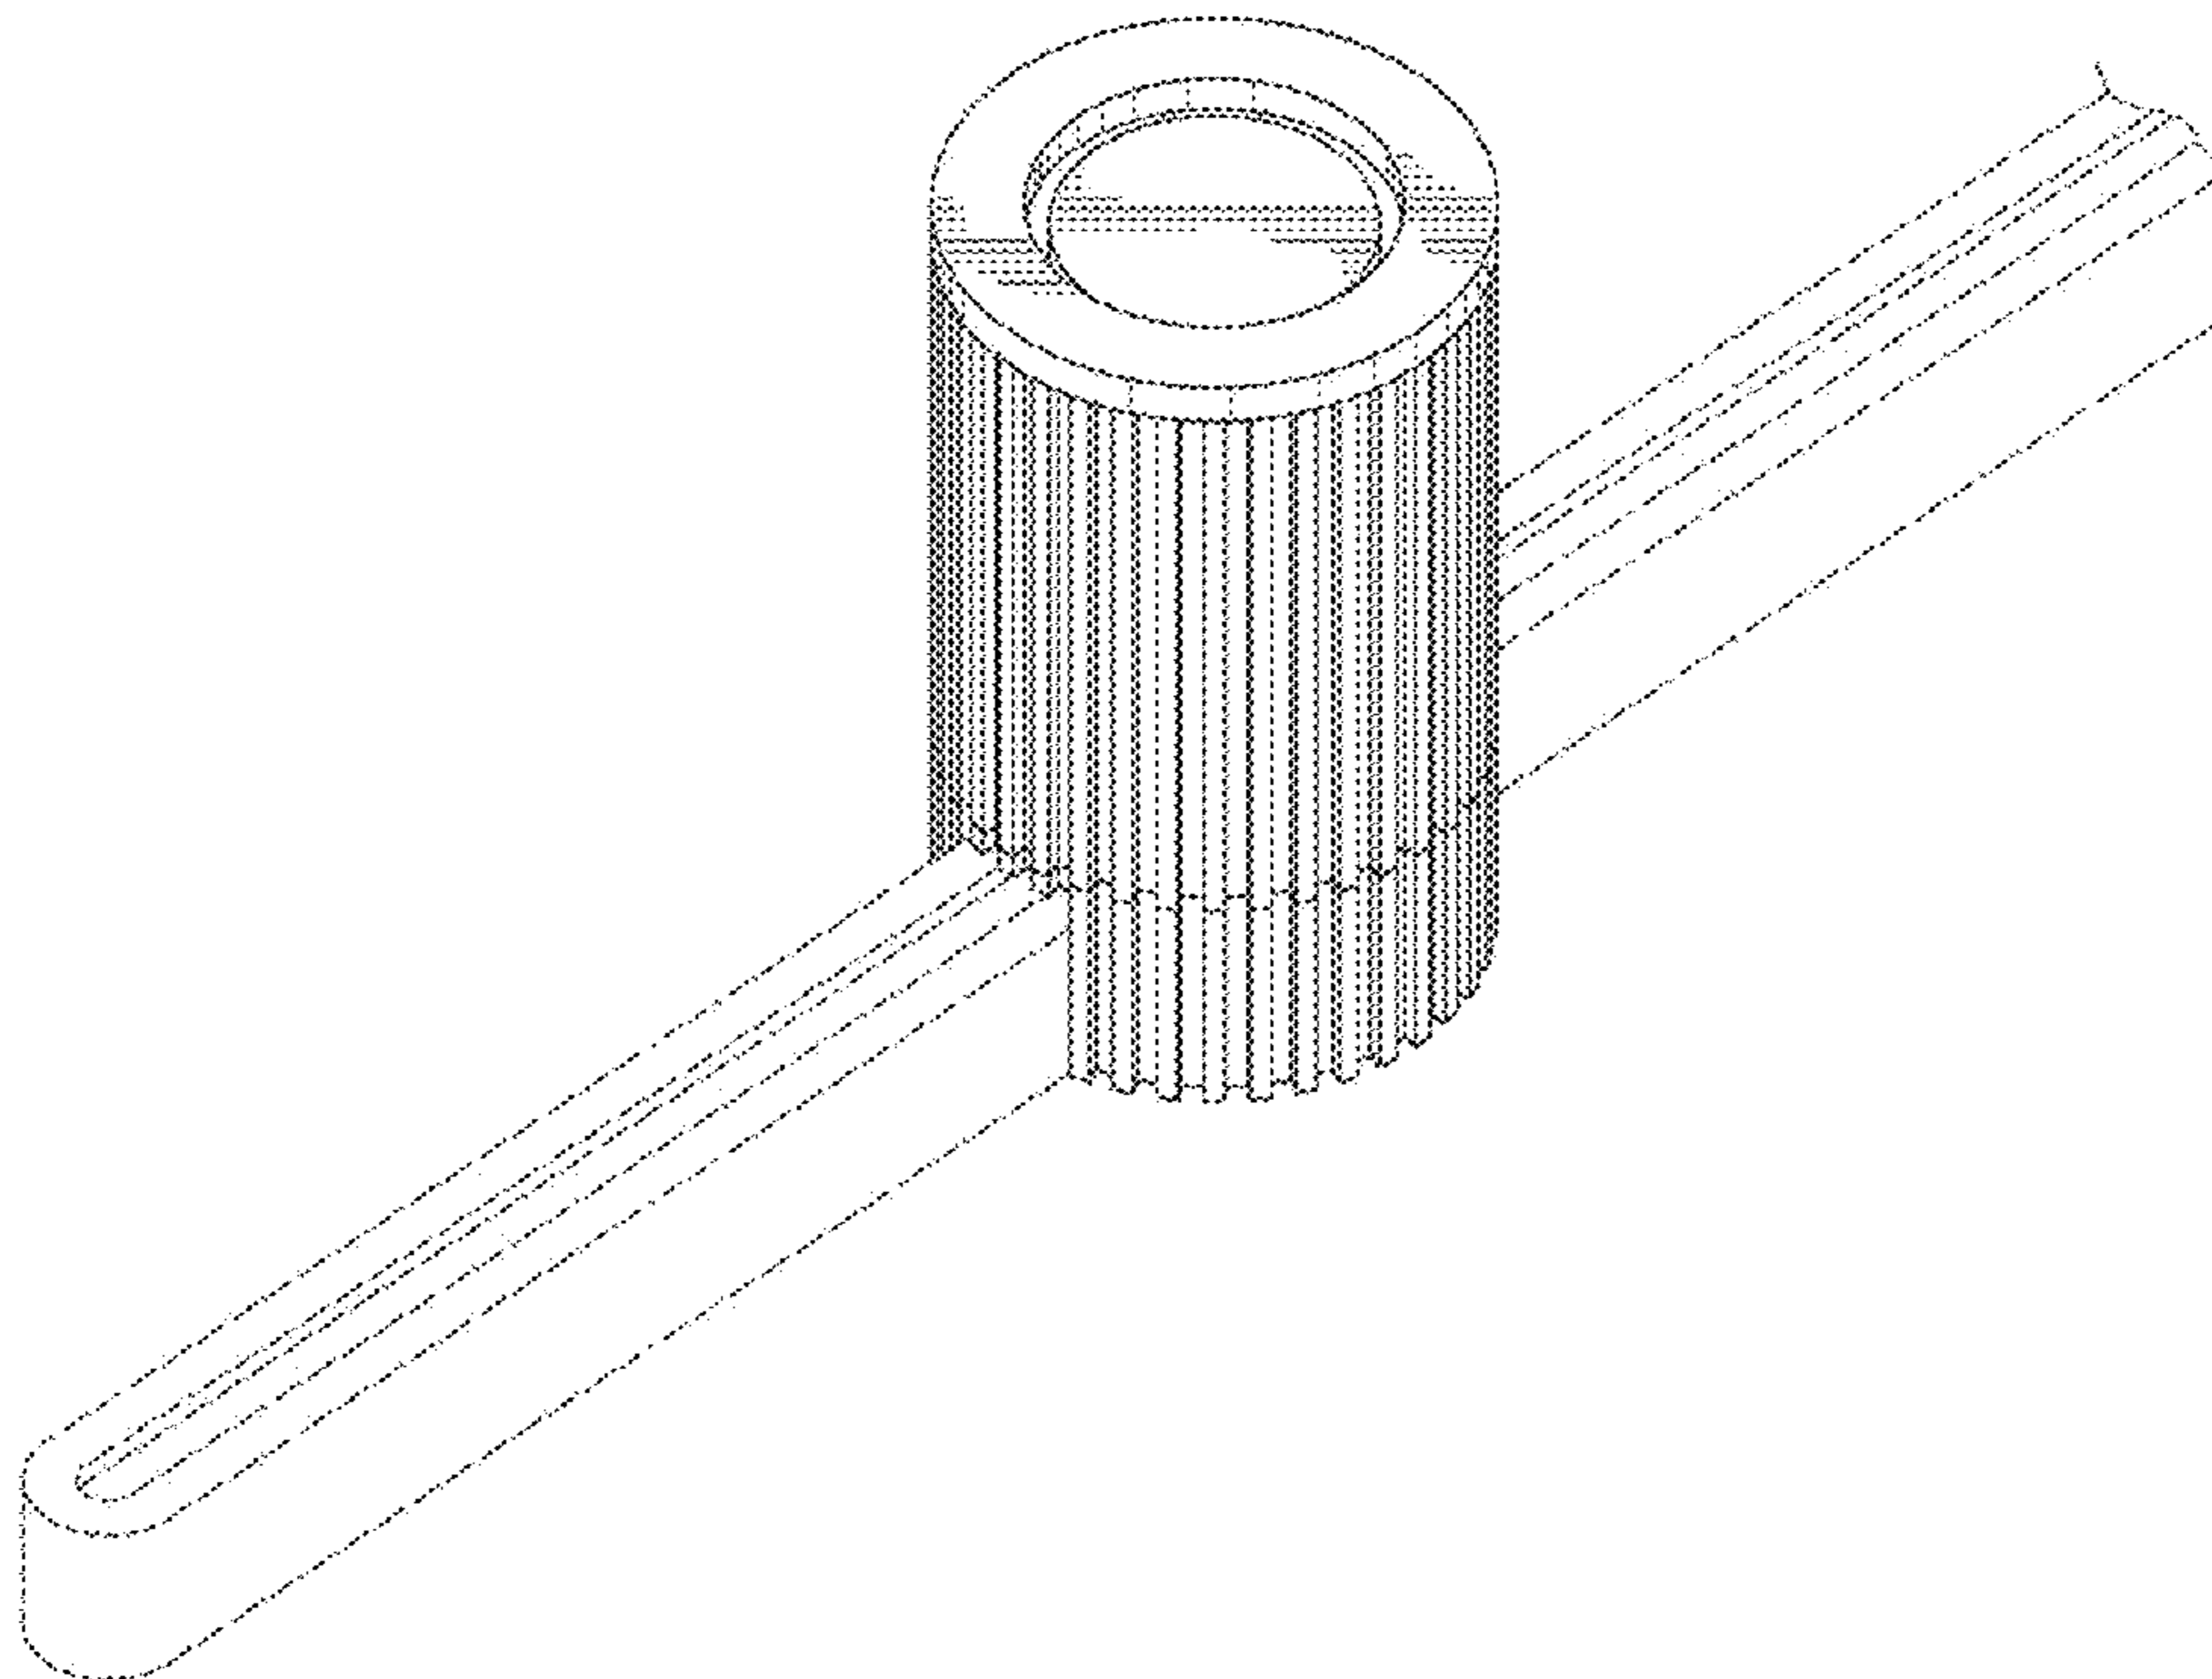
is a perspective view of the cylindrical housing for a modular lighting system showing my new design; FIG. 2 is a top plan thereof; FIG. 3 is a bottom plan view thereof; FIG. 4 is a front elevational view thereof, the rear elevational view, the right and the left side elevational views being the same; and, FIG. 5 is a perspective exploded view thereof. The broken lines shown in the drawings are included for the purpose of illustrating portions of the article that form no part of the claimed design.
